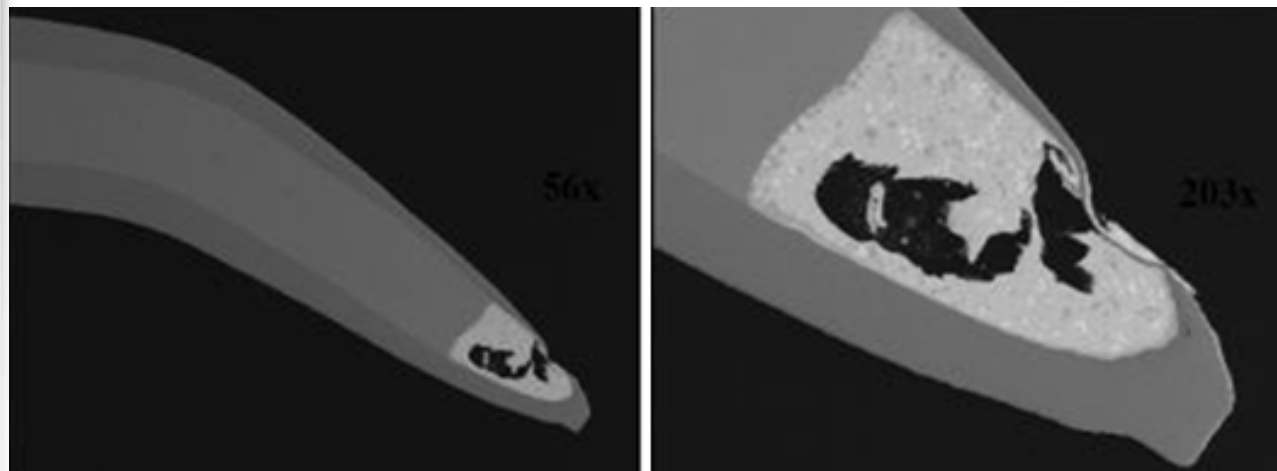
Lead-free Soldering Iron Tip Damage (Courtesy of Hakko)
